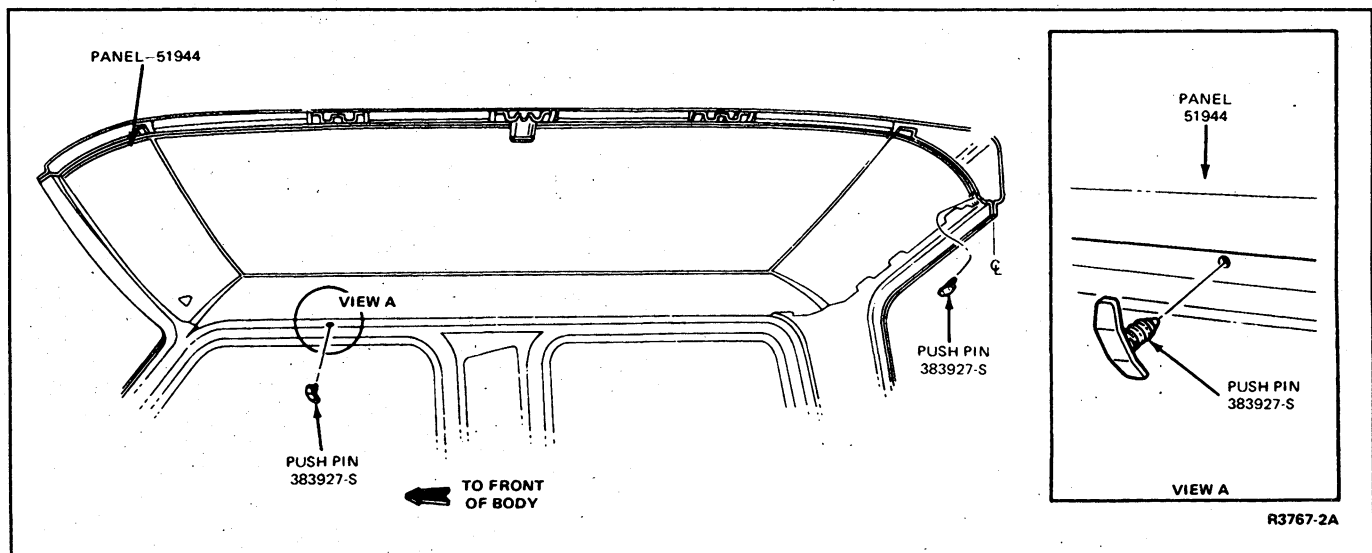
Roof Trim Panel Installation—F-350 Crew Cab
